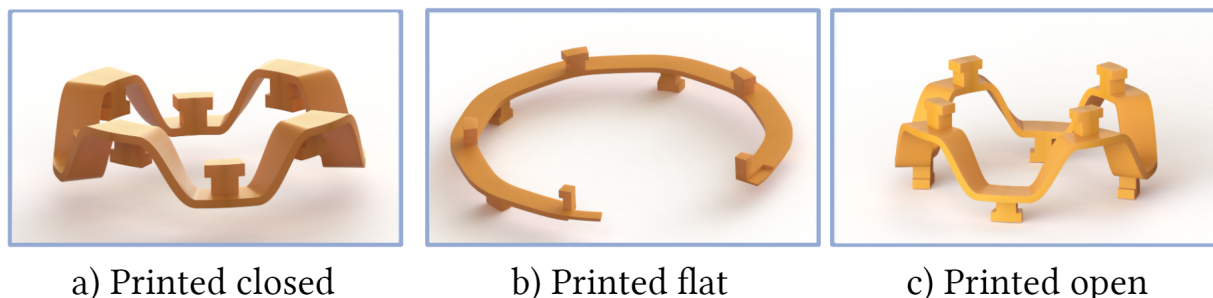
Different states of printing the cosine-shaped beam. For the open and closed states, visible in a) and c), the unit cell is printed as one part if the material is uniform. The flat manufacturing state, visible in b), is always printed separately and manually forced in the cosine shape during assembly.
